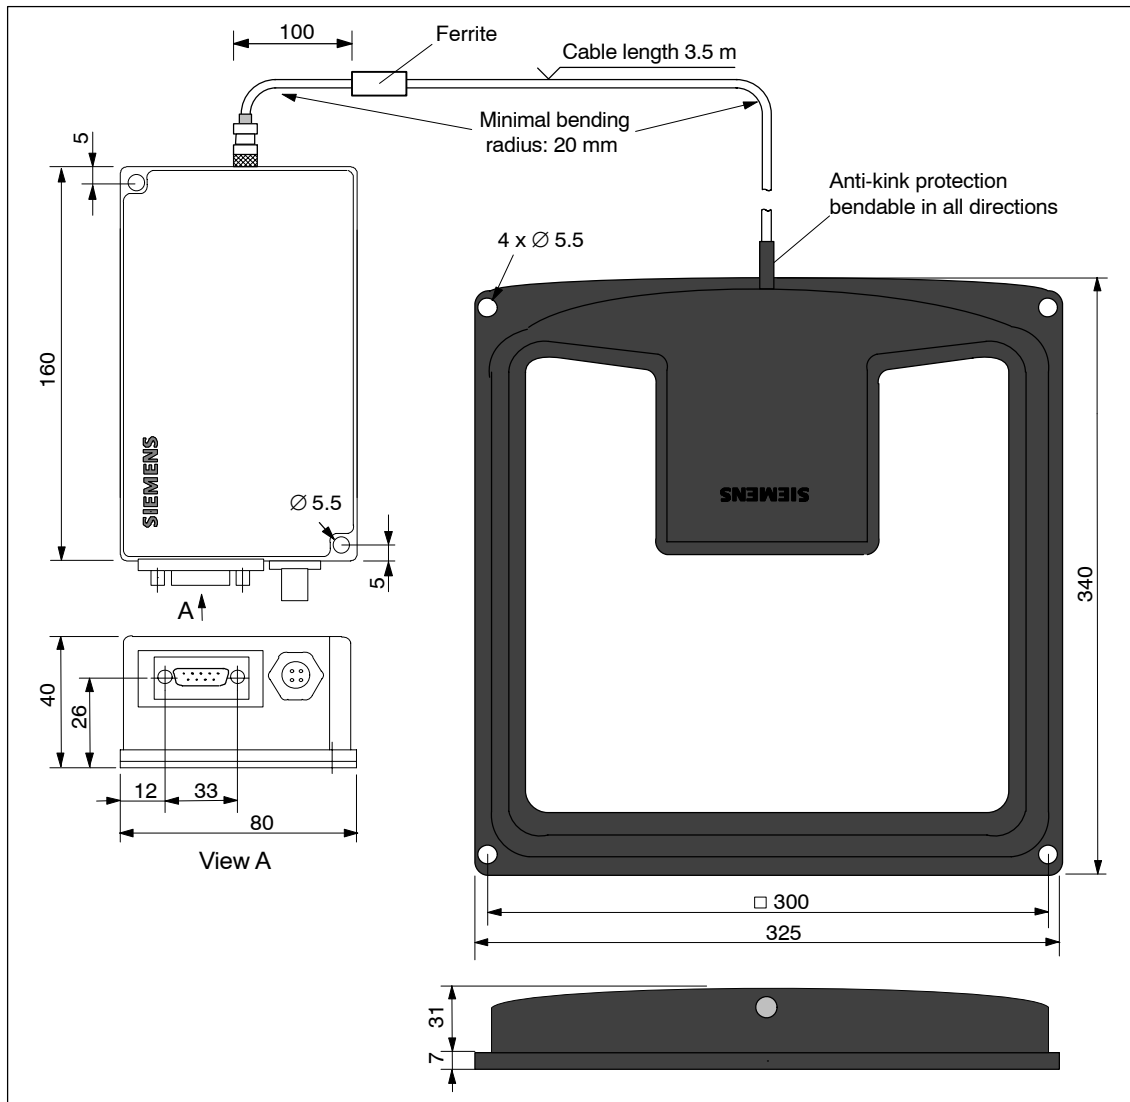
SLG D11S ANT D5 dimensioned drawing
